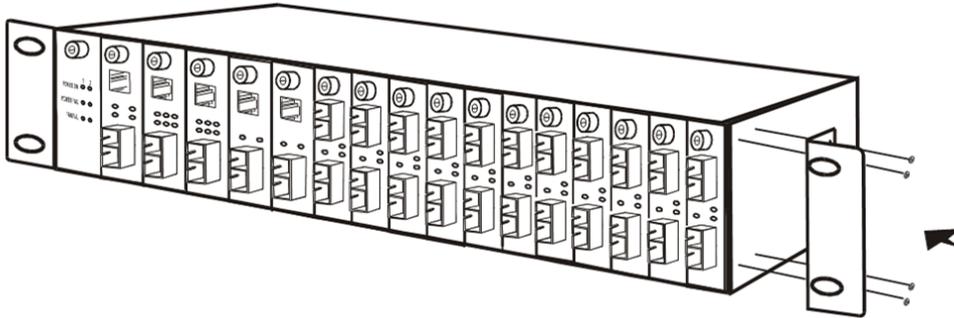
Attaching the brackets to the Managed Media Converter Chassis
